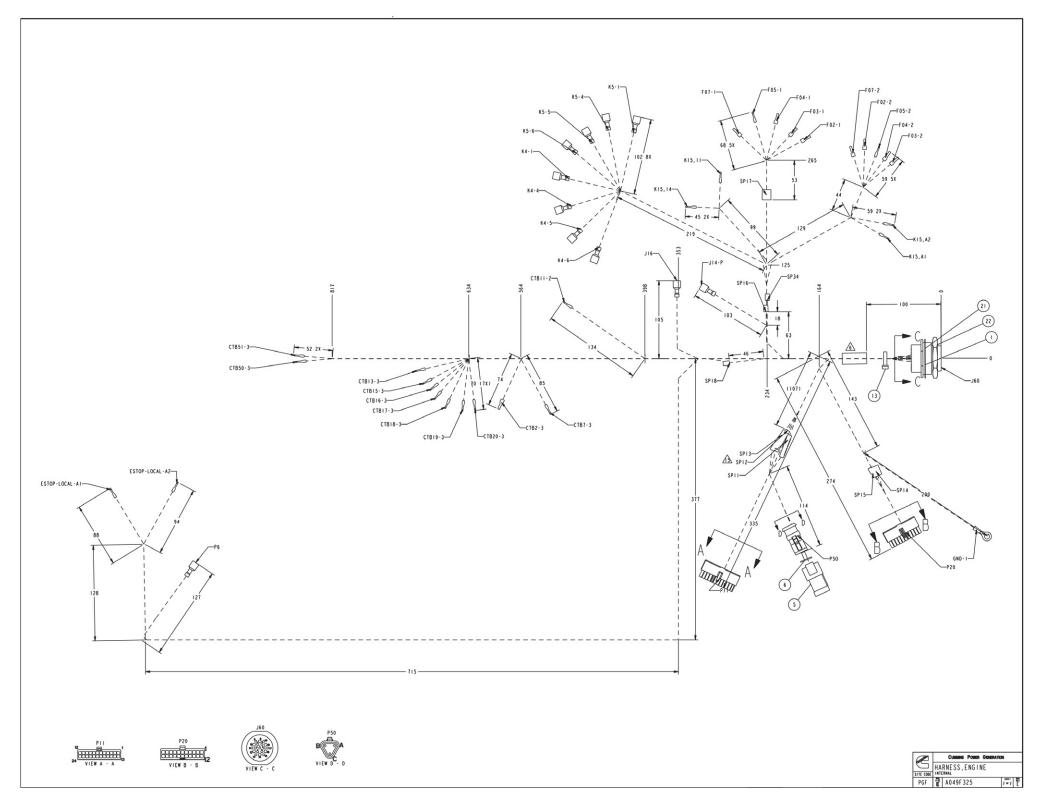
A049F325 ENGINE HARNESS (SHEET 2)
